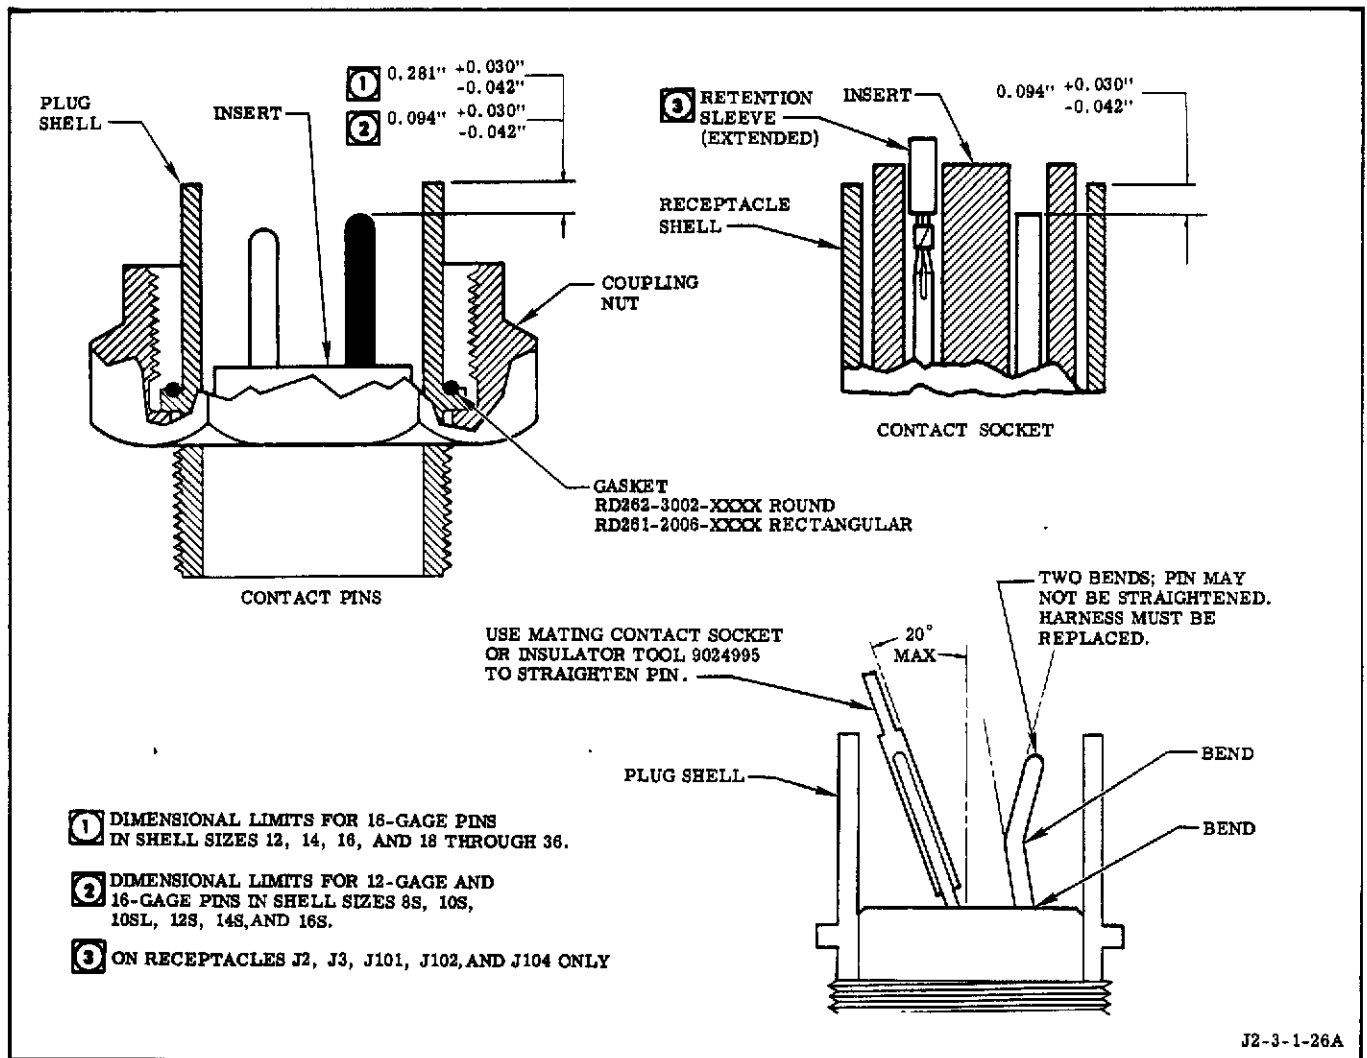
Threaded-Type Electrical Connector Damage Limits
